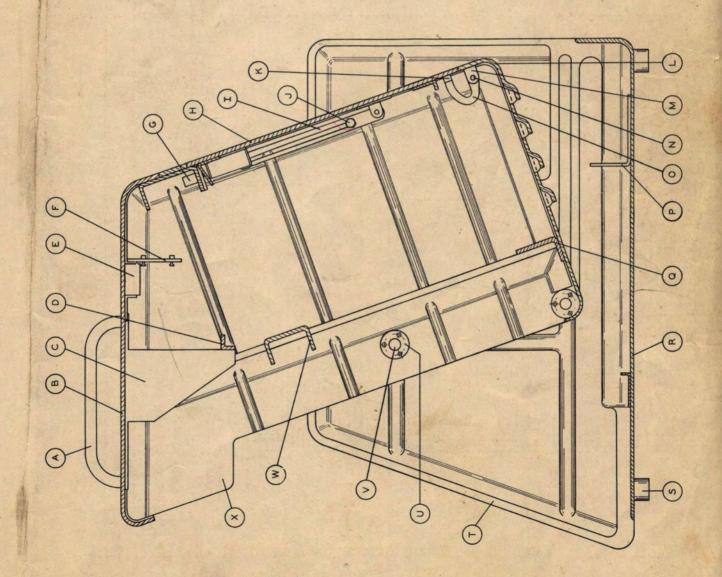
Type 212B Console Unit Mechanical Details, Sectional View
